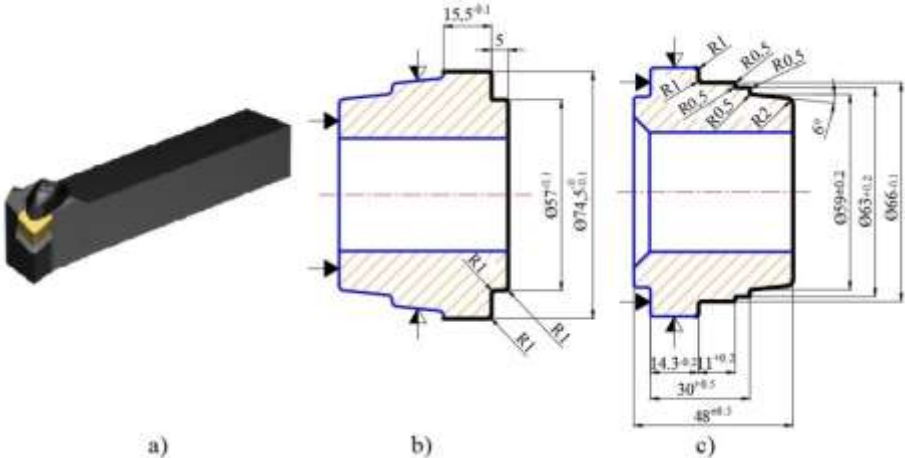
a) Shank tool for turning; b) Third pass; c) Third pass
